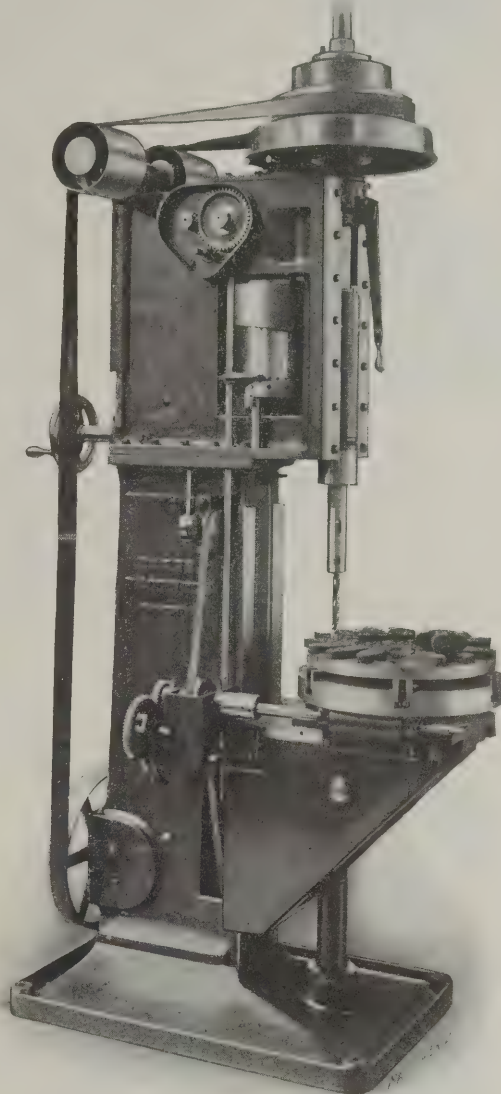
View of Baker Bros. Drilling Machine showing Table Indexing Mechanism
